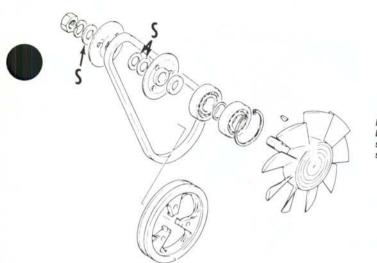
Cooling fan drive belt is adjusted by moving shims (S) on fanshaft sheave. Refer to text for details.
